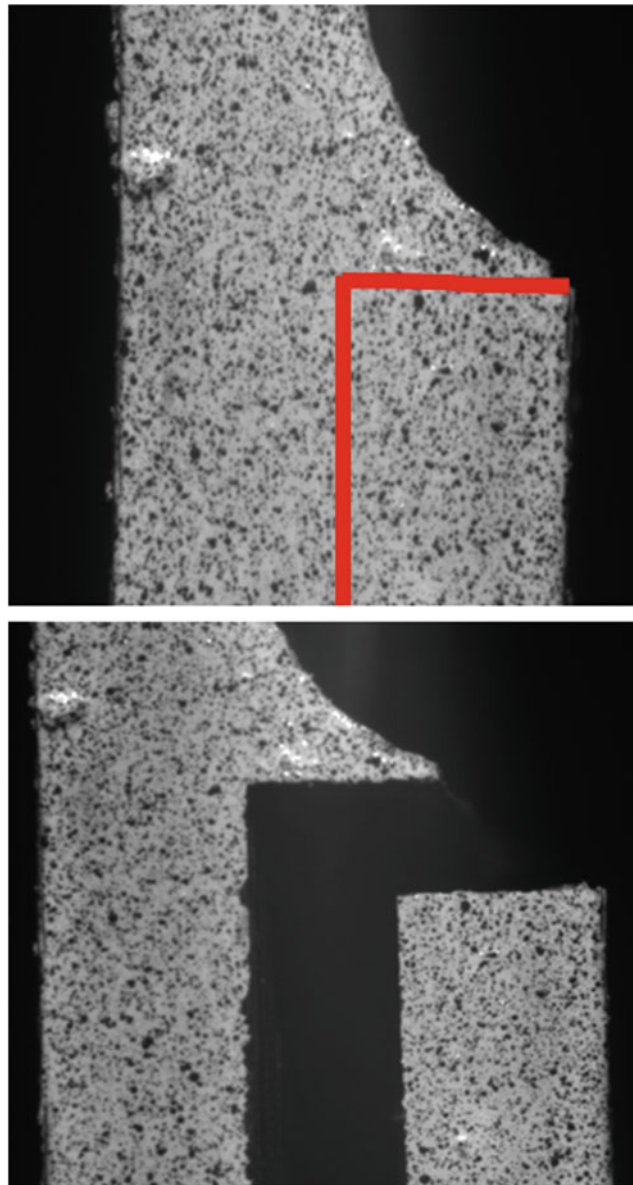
Crack propagation path in the weld polymer bondline
